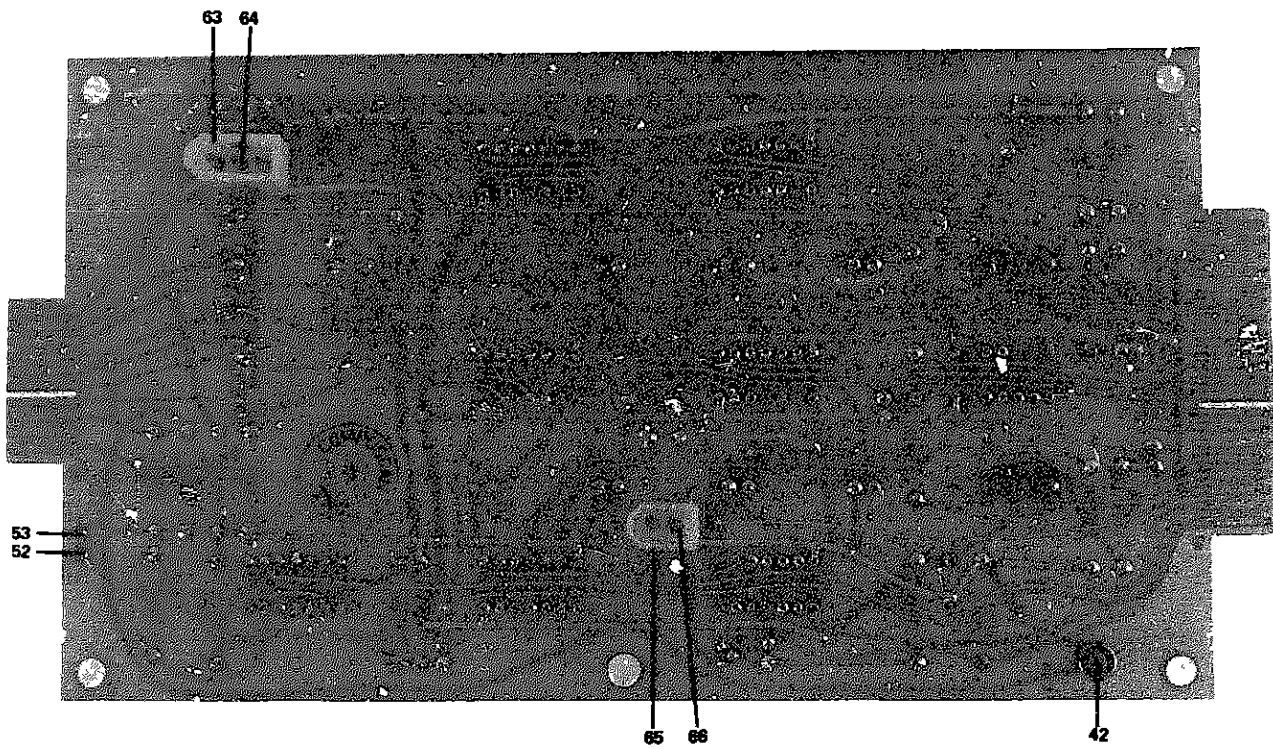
CONTROL PANEL CIRCUIT CARD ASSEMBLY BACK 1A6A1A1 (SHEET 2 OF 2)
